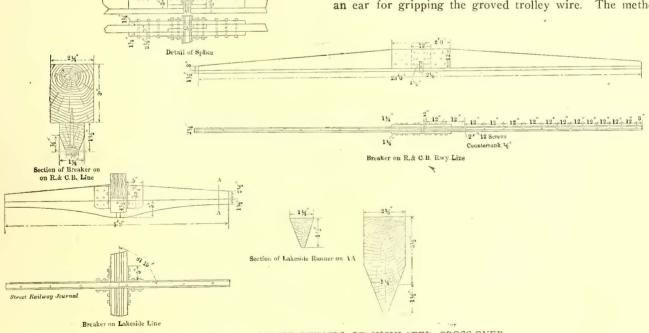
DRAWING SHOWING DETAILS OF INSULATED CROSS-OVER
